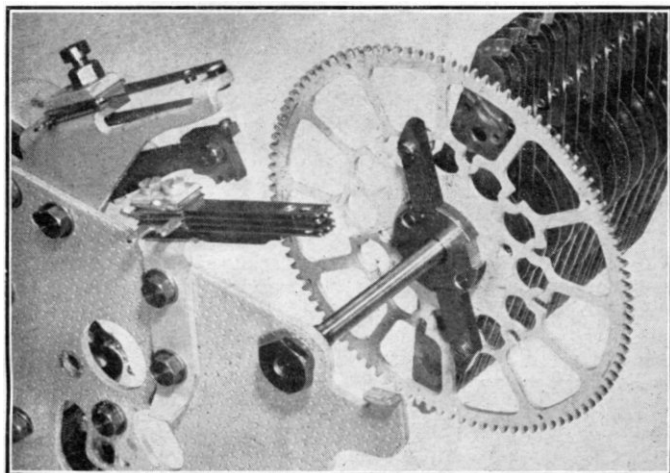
WIPER ASSEMBLY SHOWING FIXING OF AXLE TO SIDE PLATE.
